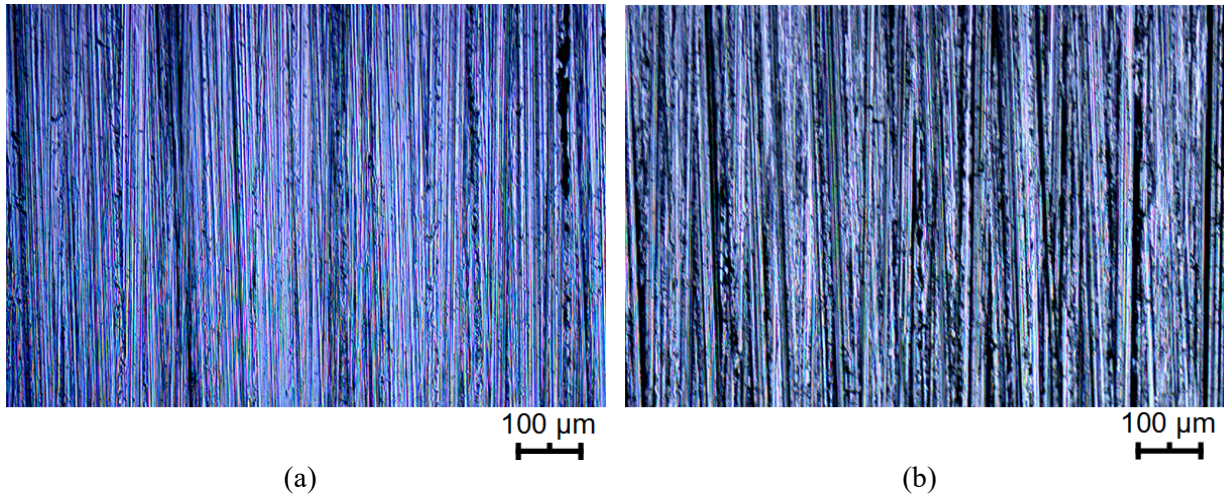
Surface characterizations after testing (LSM): (a) workpiece 1, (b) workpiece 2
